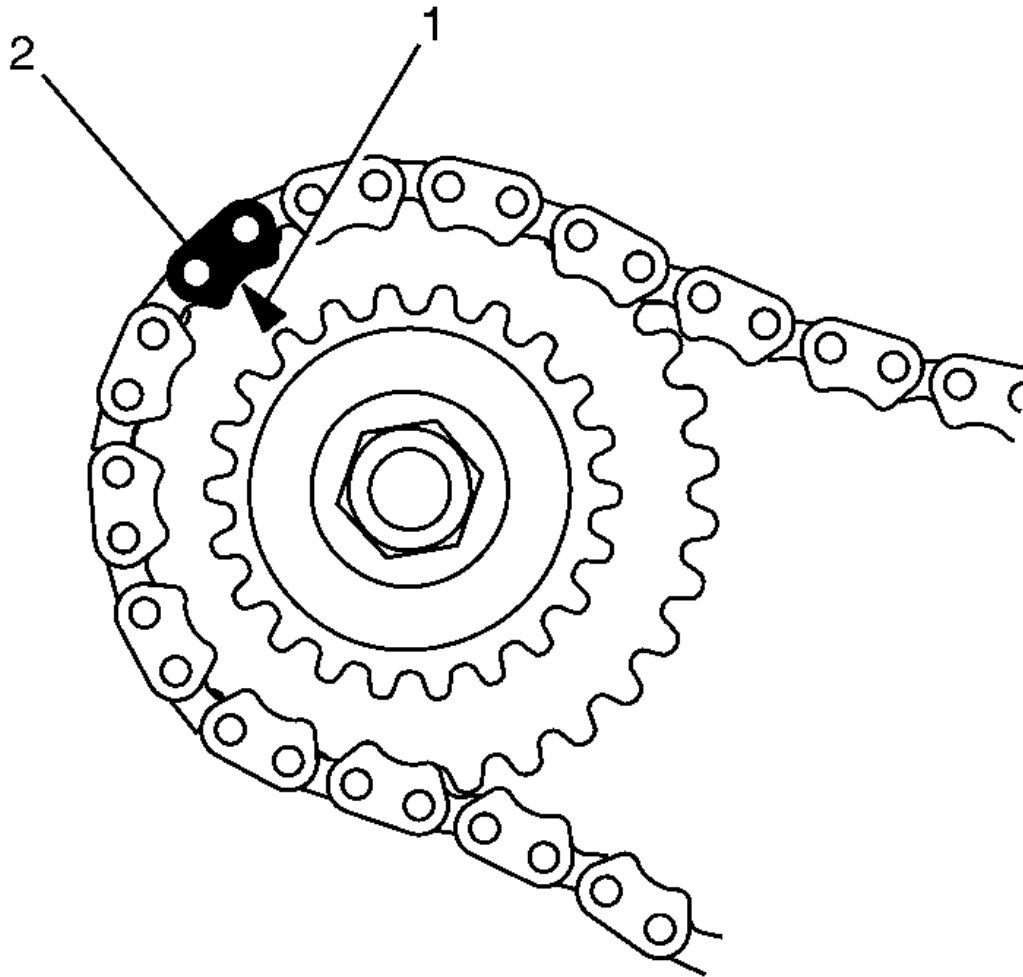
View Of Left Camshaft Intermediate Drive Chain Idler Timing Mark & Timing Camshaft Drive Chain Link
